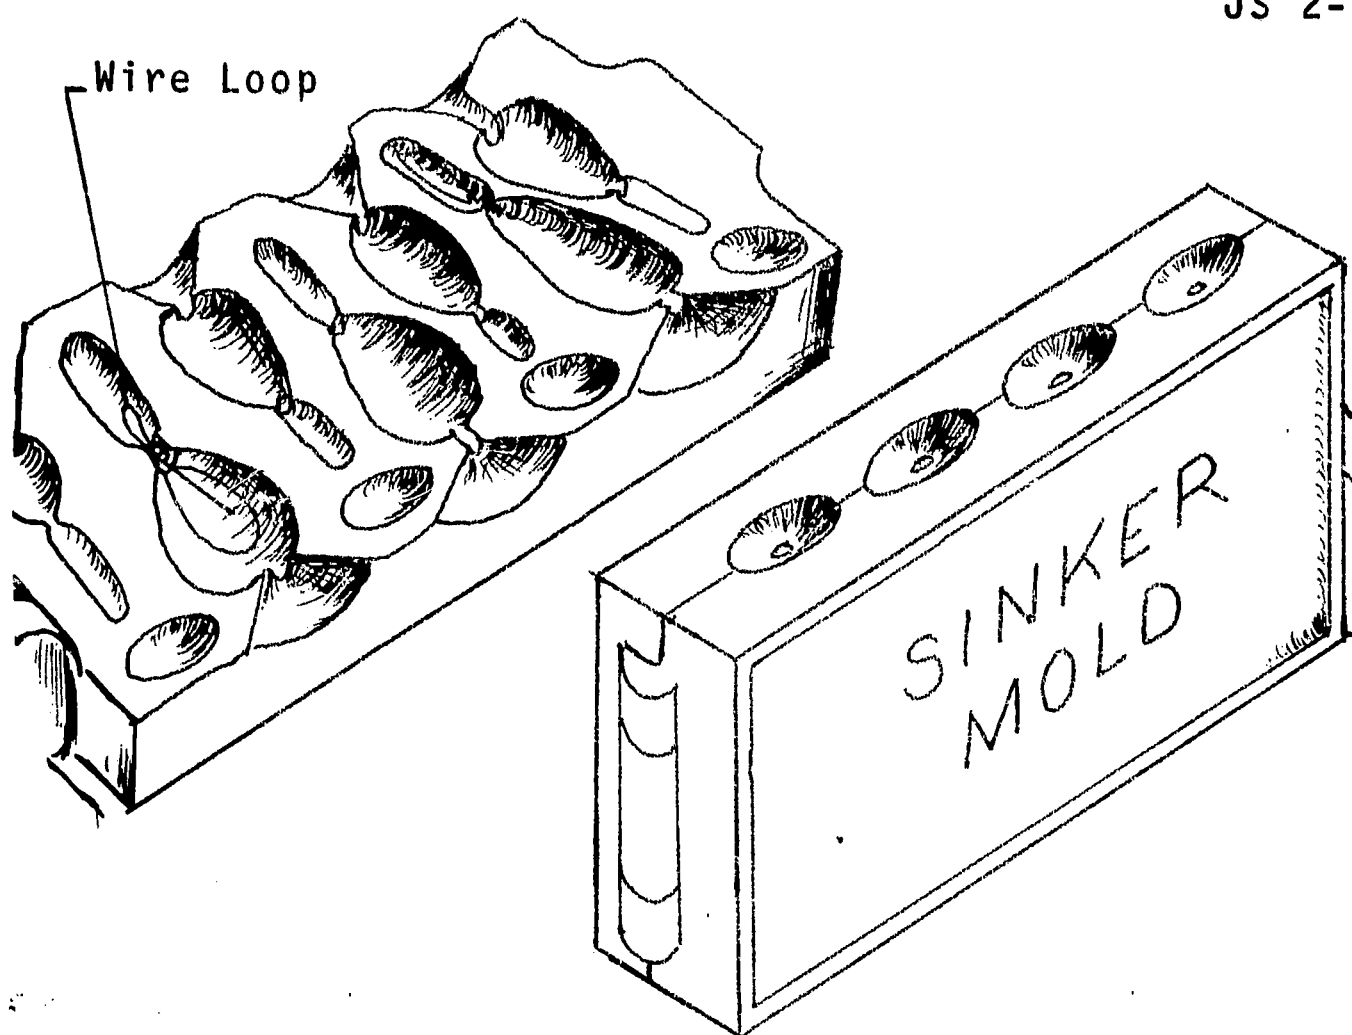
Illustrates a commercial sinker mold open with one loop laid in the mold cavity. This particular mold may be used by pouring into both sides of the mold, thus making 2 or more sizes of sinkers.
